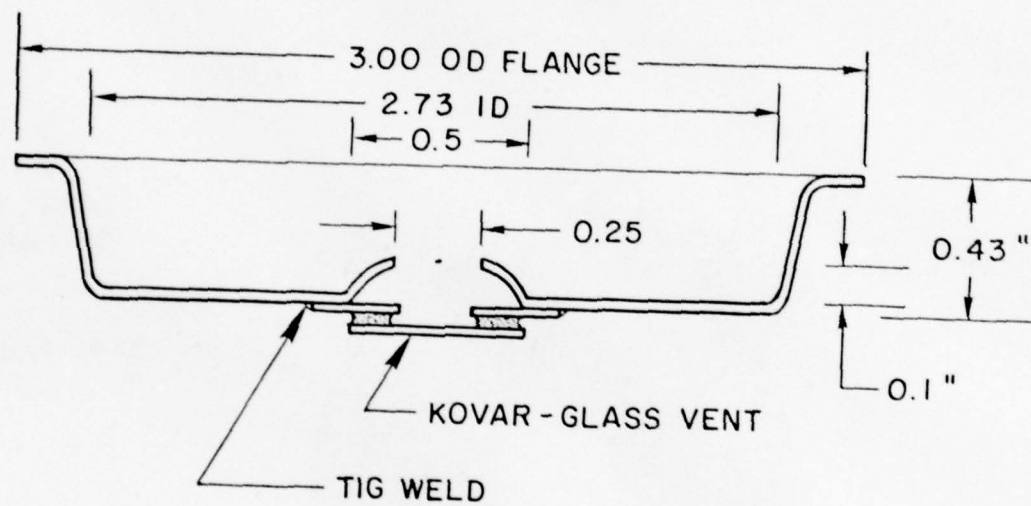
Bottom of hermetically sealed flat cell showing low pressure G/M seal vent
